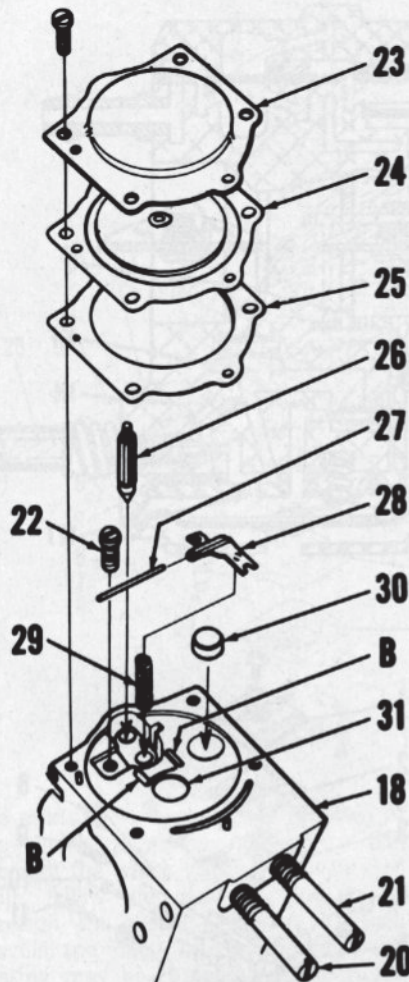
Exploded view of metering diaphragm assembly used on Walbro Model SDC. Refer to Fig. S21 for other carburetor components.
